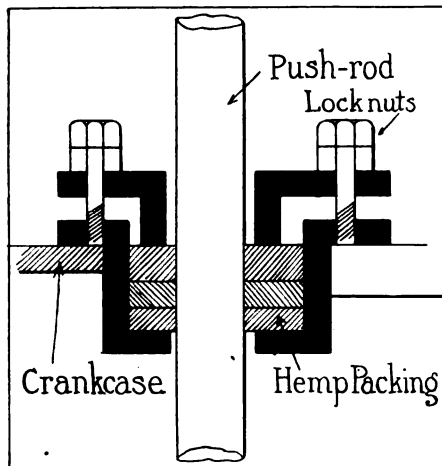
Valve rod stuffing box to prevent leakage of oil from crankcase.
